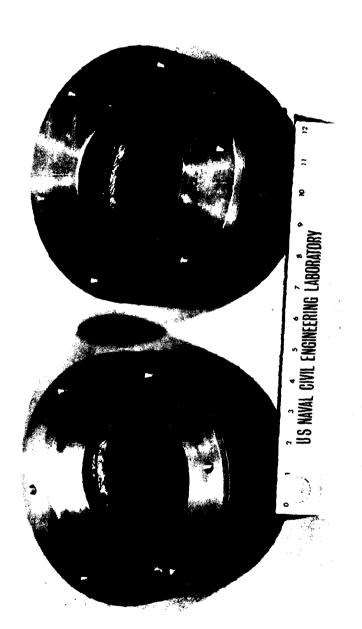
Seal test jig bottoms. Angular flange on left, flat flange on right.
